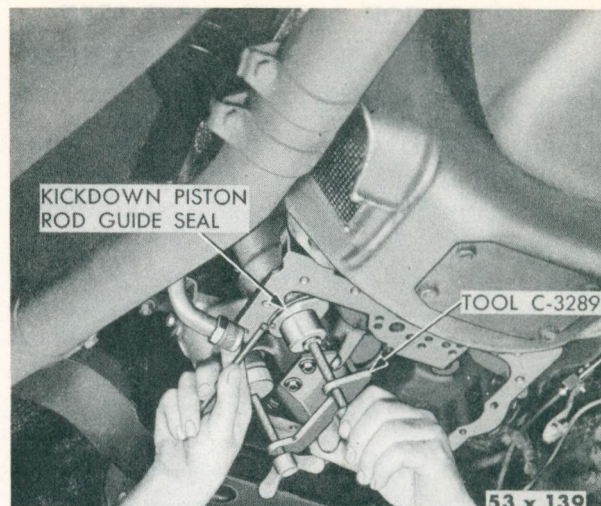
Positioning Kickdown Piston Rod Guide Seal (Typical View)
